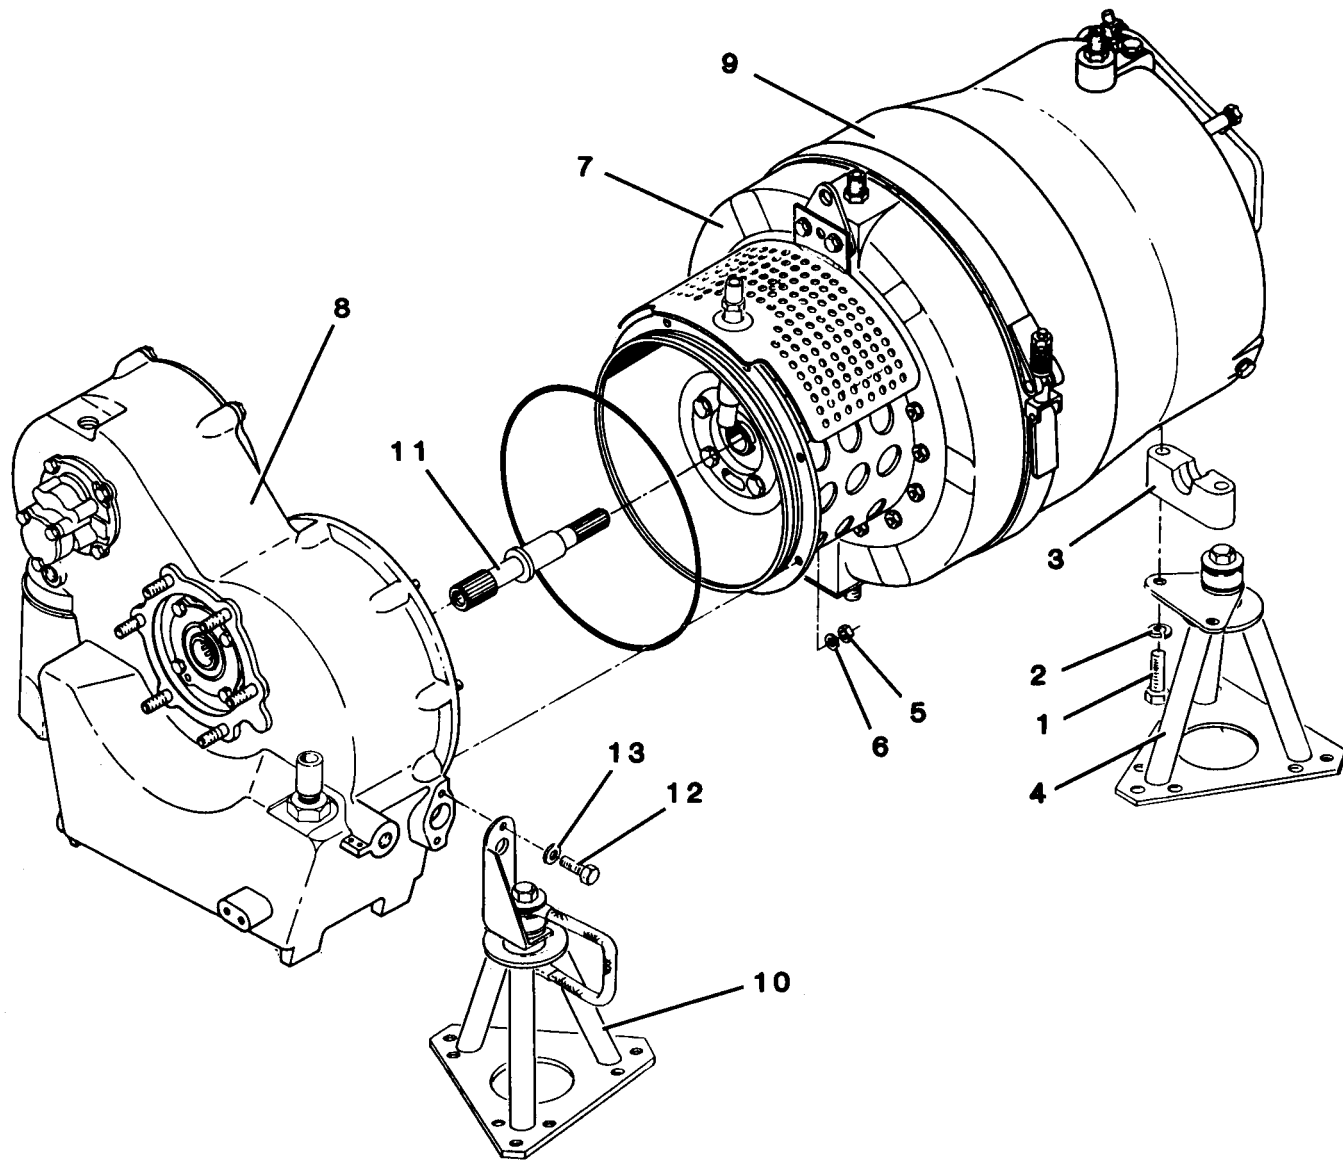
Gearbox Removal (Sheet 1 of 2)
